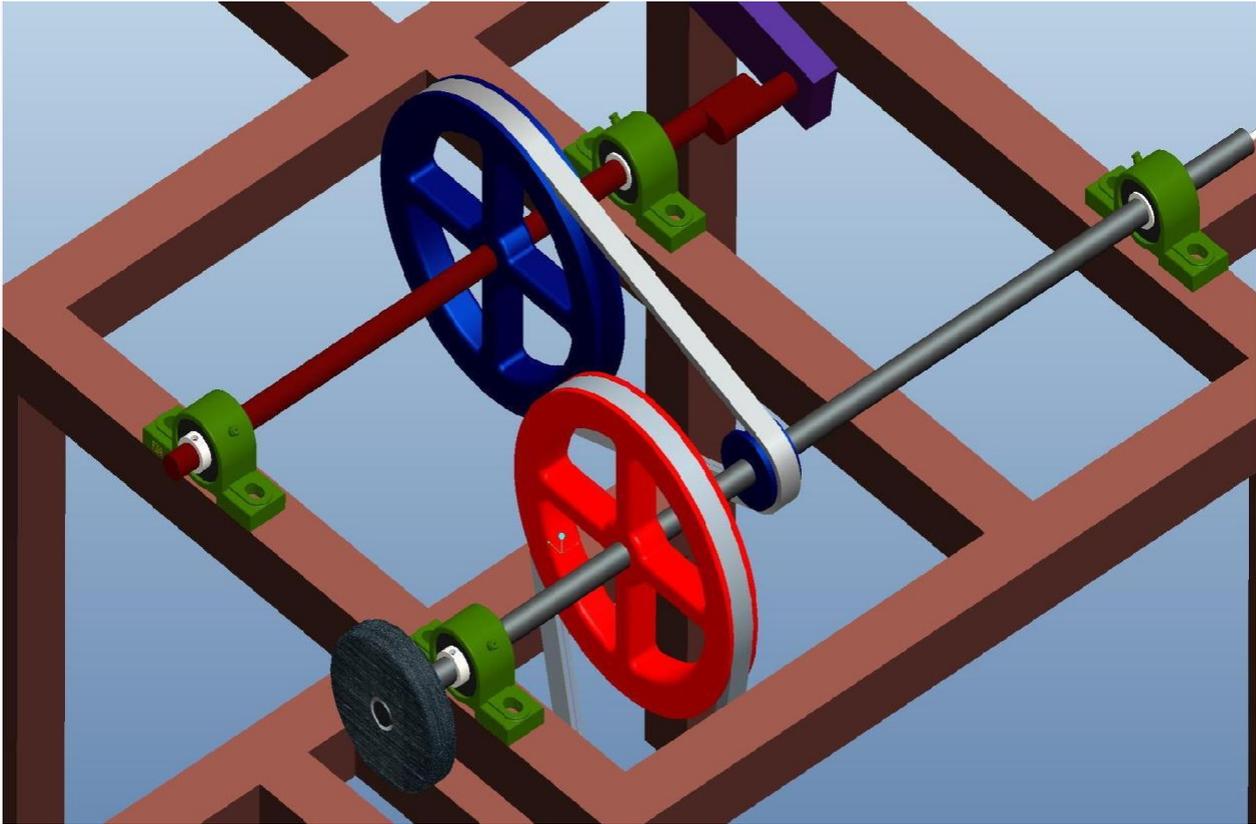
Belt Drive Connection System of Multipurpose Machine
